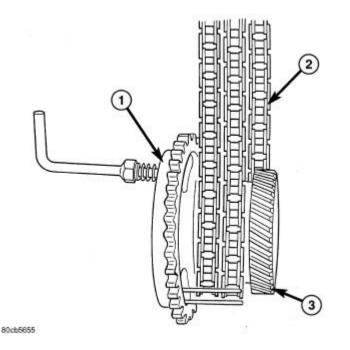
Using Special Tool 8429 Courtesy of CHRYSLER LLC
